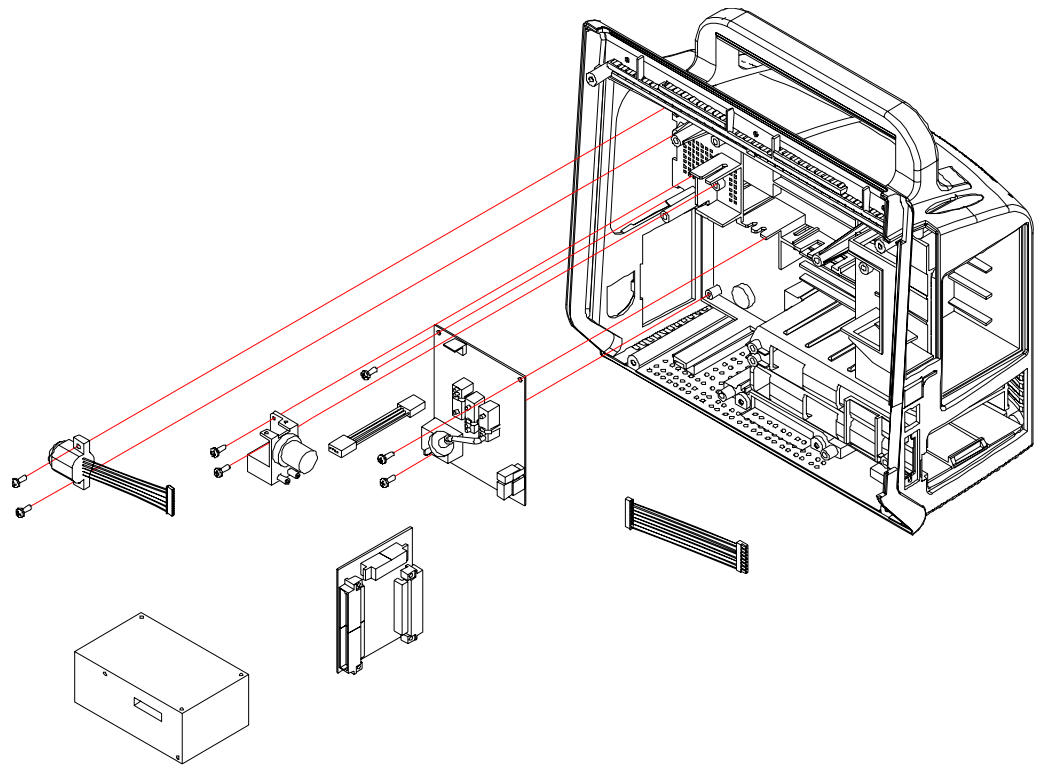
Rear Case Disassembly – NIBP Module, Hub Board, ECG Wire, CO₂ Module
